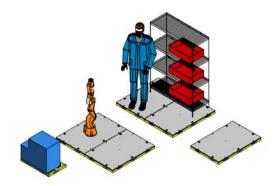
Mobile and modular assembly units for changeable assembly lines.
